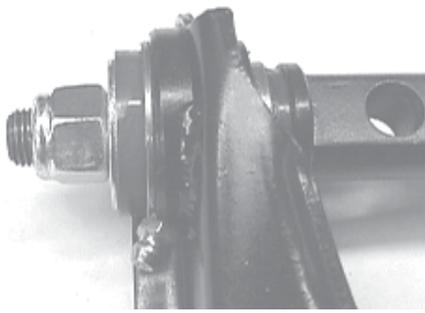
This is a closeup of the completed upper A-Arm showing the position of the grease fitting. Also visible in this shot is the skip weld connecting the bushing shell to the A-Arm stamping.
